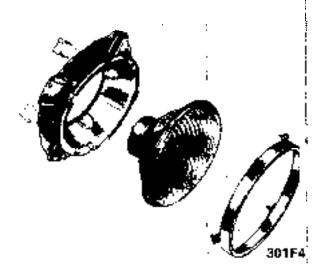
F-4 - Headlight Assembly - Models 57-57R
